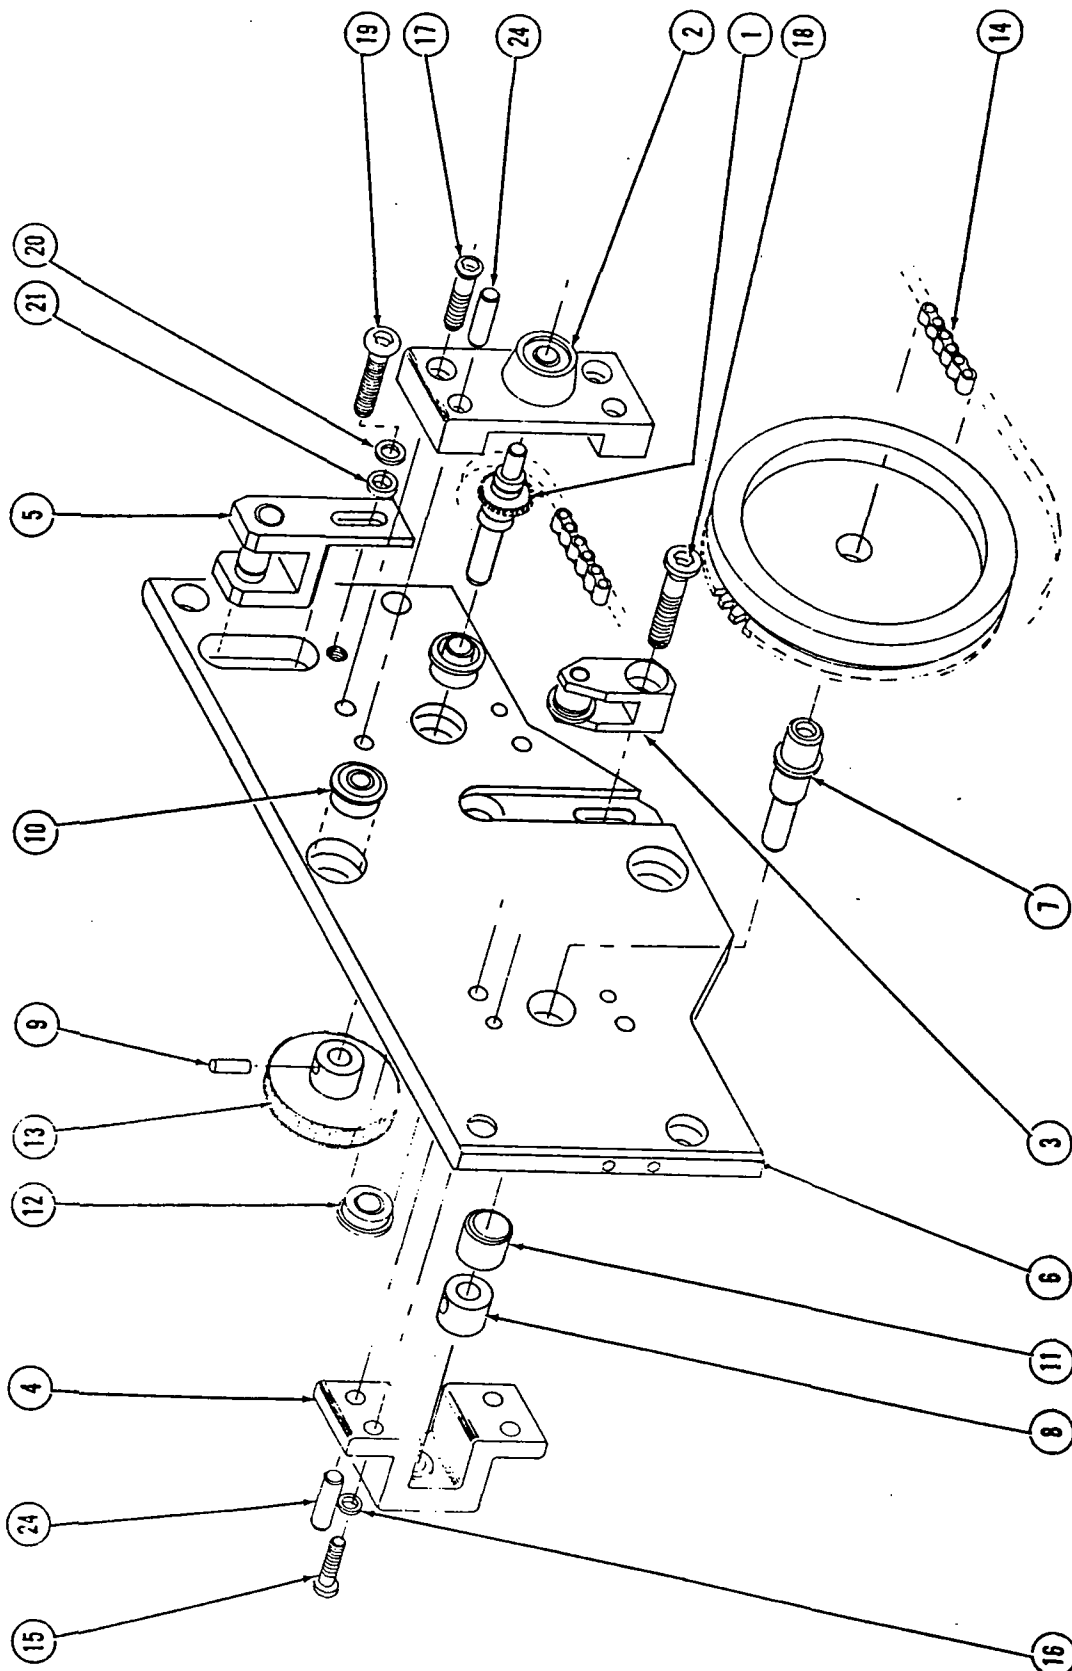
FRONT PLATE ASSEMBLY - Part No. 182276A
